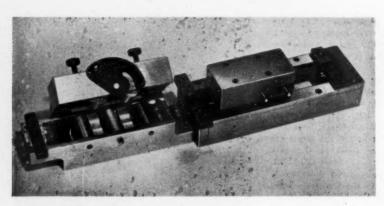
This Recentlyintroduced Roll Straightening and Grip - feed Unit, Designed to Feed Laterally, Provides a 3-in. Feed Stroke for the 3-ton Machine, and a 5-in. Stroke for the 9-ton Size
